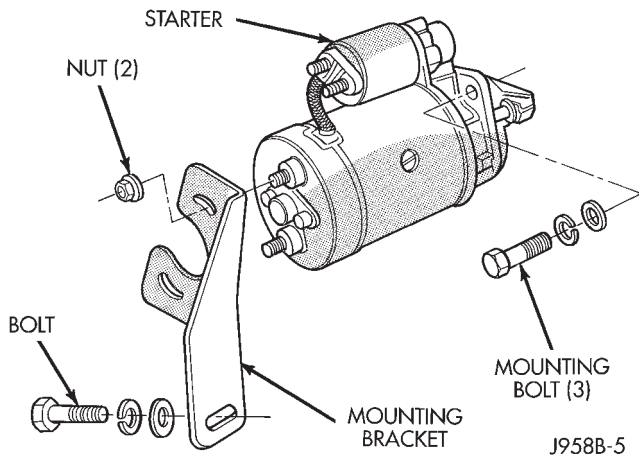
Starter Mounting - 2.5L Diesel Engine
